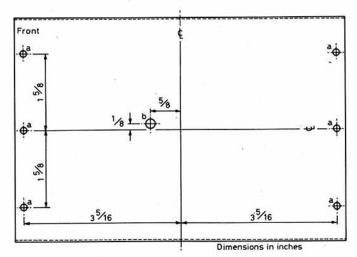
Right-hand side panel (as seen with flanges away from viewer). (a) 4BA clearance hole for bolting to flanges on front and back panels. (b) 0 · 203in dia hole for mounting T2
